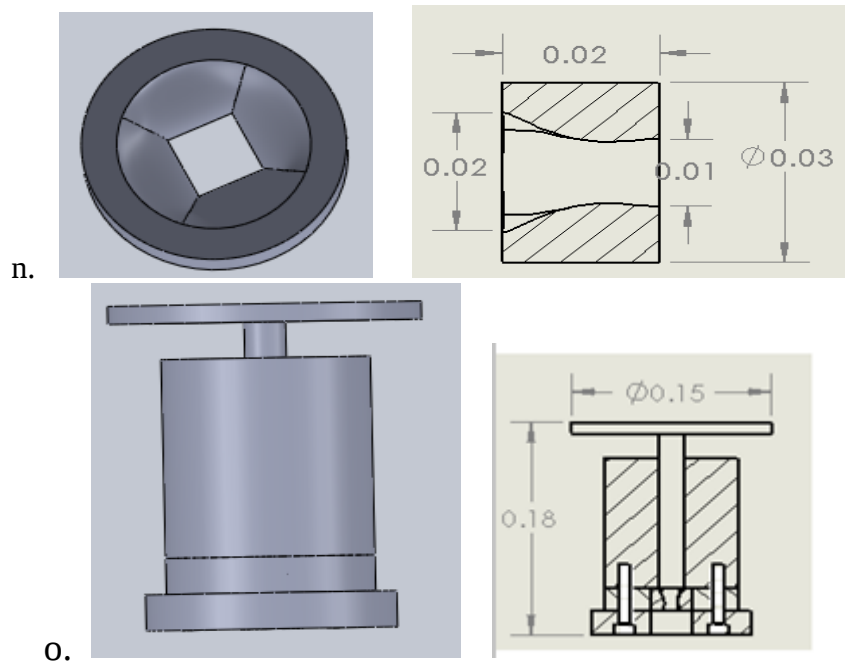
18 3rd order polynomial dies 3D and 2D section view and f) 3D assembly and 2D sectionsl drawing
